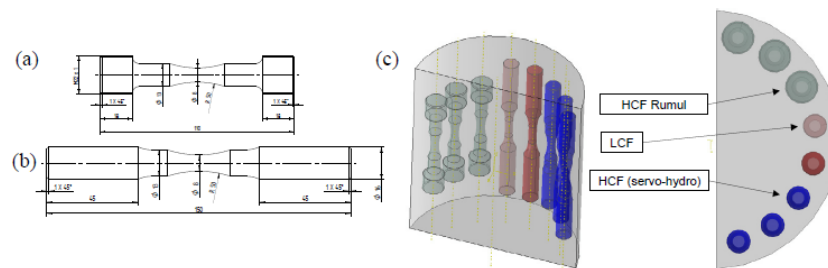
a) Details of fatigue experiments, b) shape and dimension of HCF specimens; c) positions of the specimens in the railway axles segments [29].
